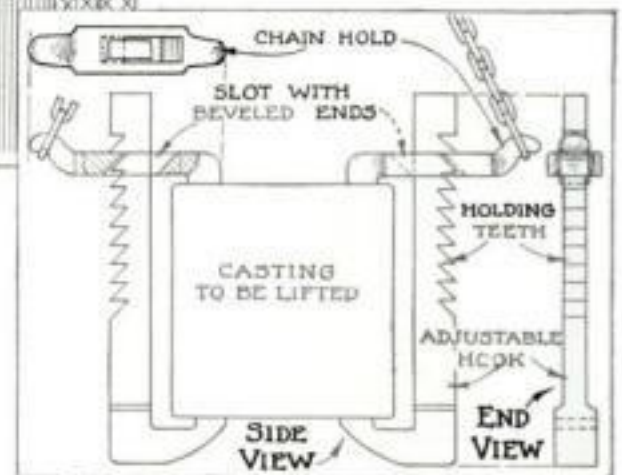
Four simple forged steel parts make up this ingenious, quick acting lifting rig.
